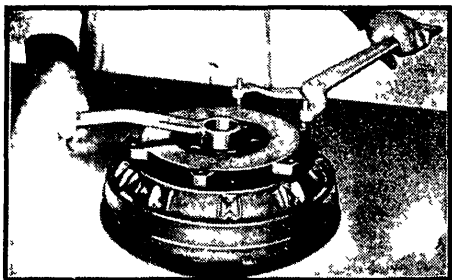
C Removing clutch plate nut, 1939-52 fluid drive
